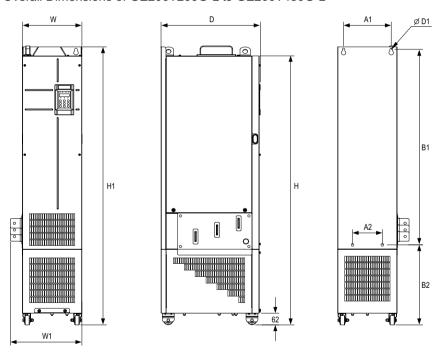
Overall and mounting dimensions of GE200T200G-L to GE200T450G-L (with the reactor base)
